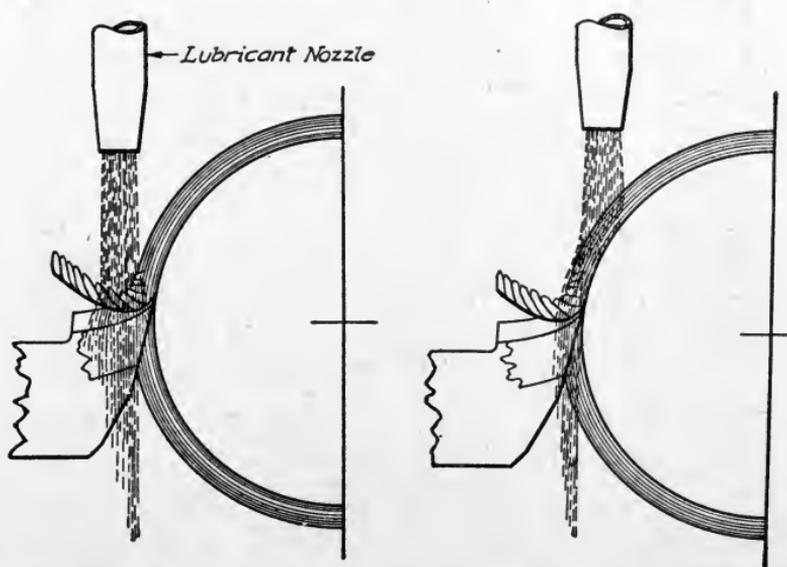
Right and Wrong Method of Feeding Lubricant to Cutting Tool
